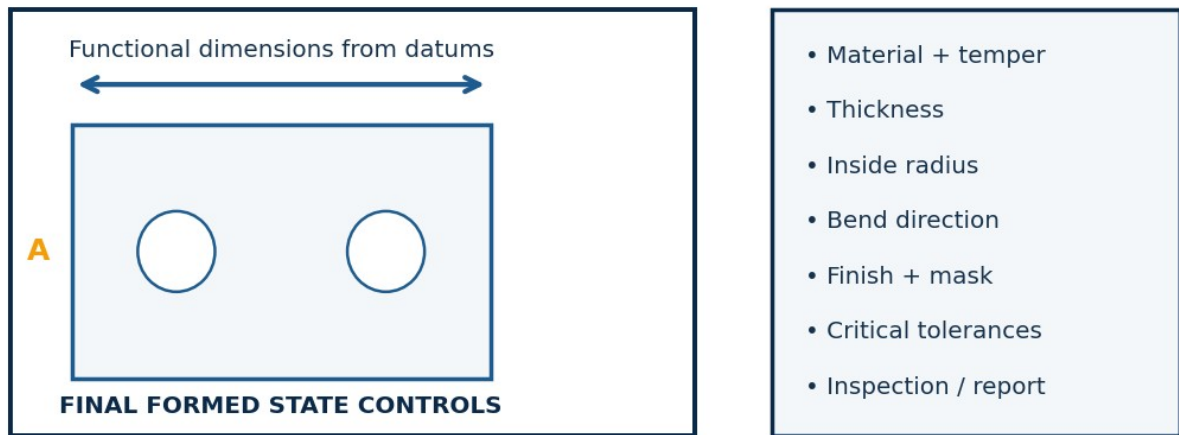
A manufacturable drawing identifies material, formed-state datums, bend intent, finish and inspection needs.
